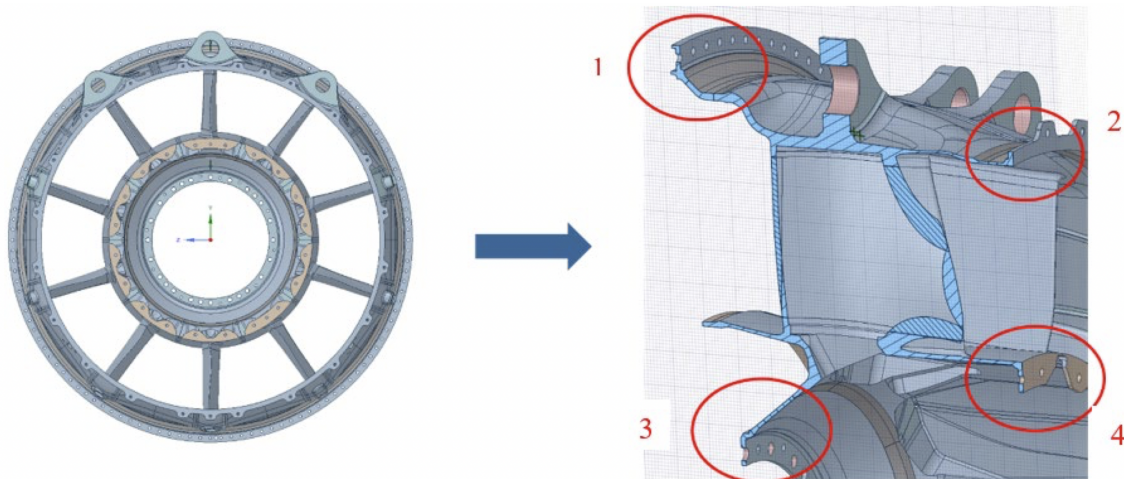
Two views of the TEC showing the three engine mounts and the tube support bosses on the left, and the forward outer flange (1), rear outer flange (2), bearing house flange (3) and rear inner flange (4) on the right (Bonifaz, 2019)
